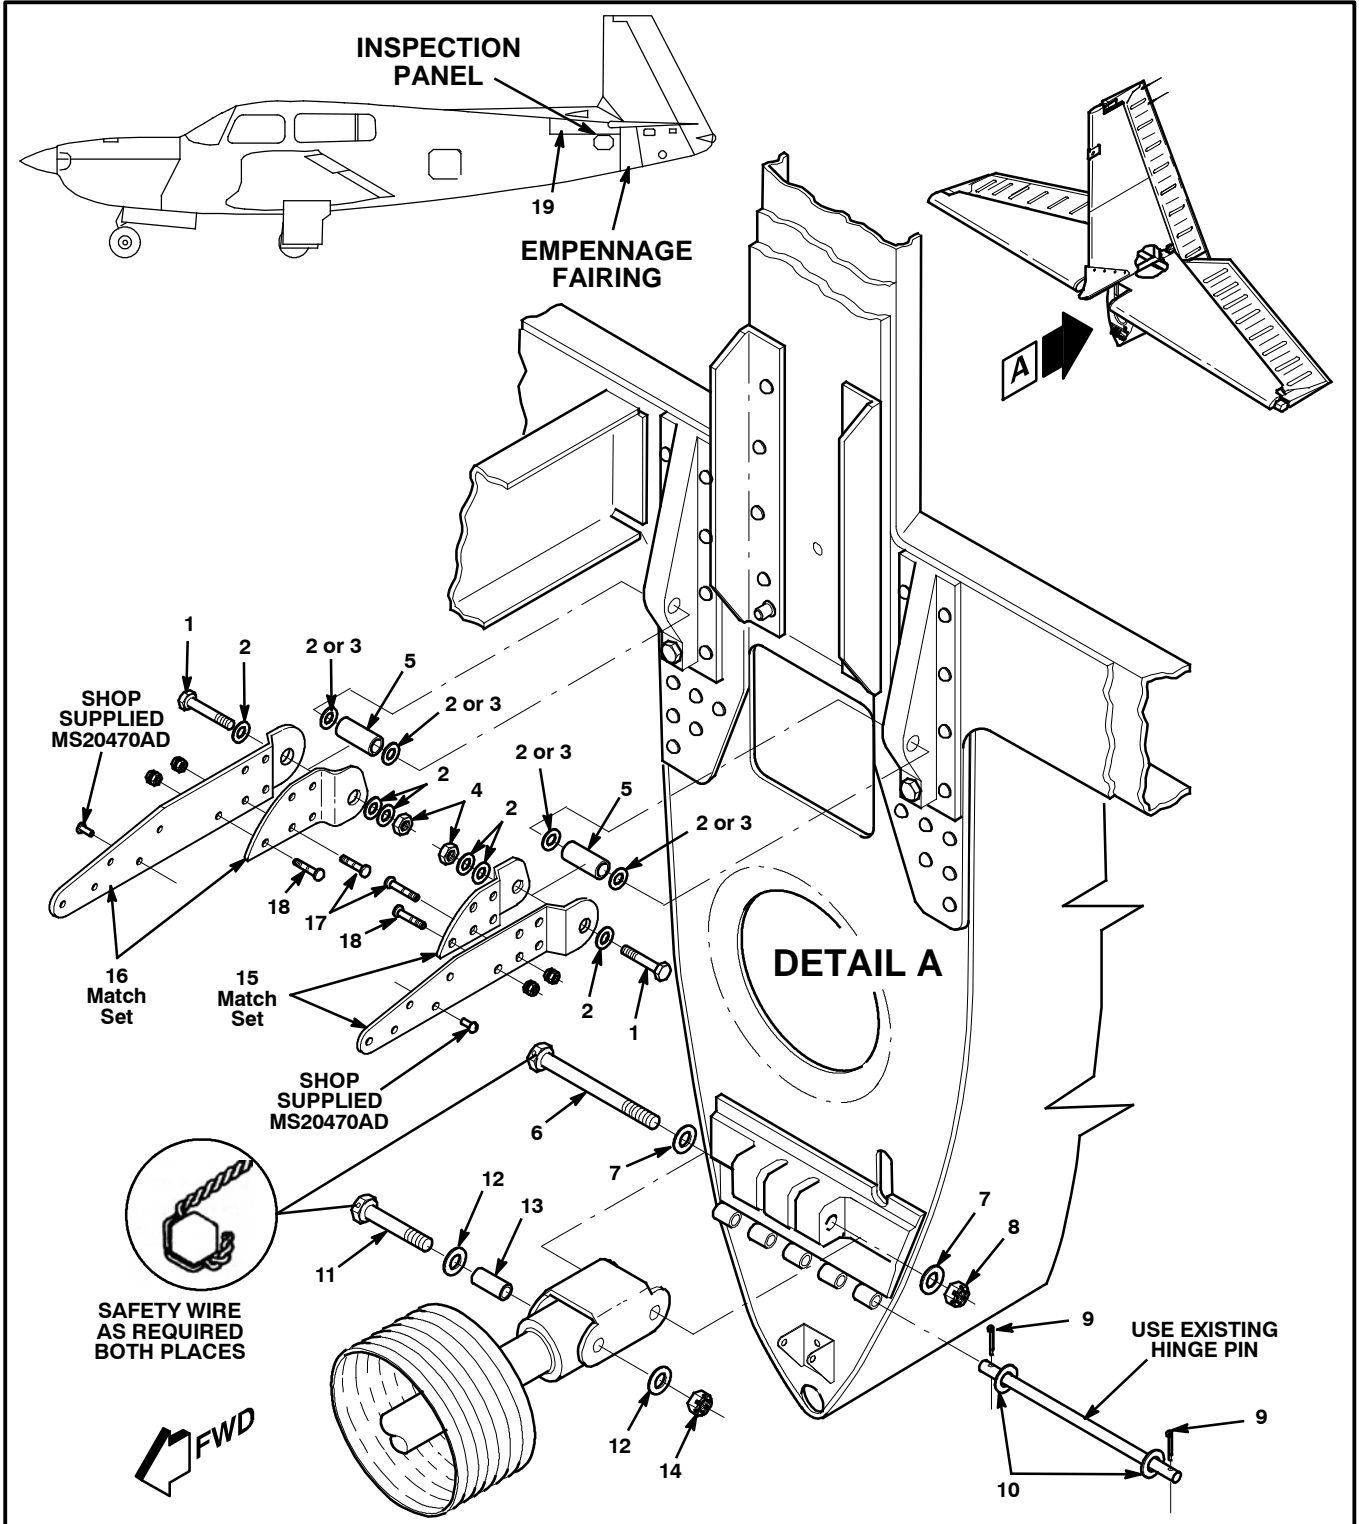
EMPENNAGE TRIM ATTACH FITTING INSPECTION AND REPLACEMENT
